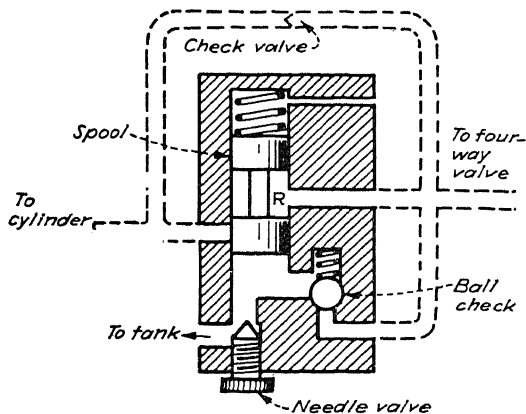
Time-delay valve. (Courtesy of Product Engineering.)
